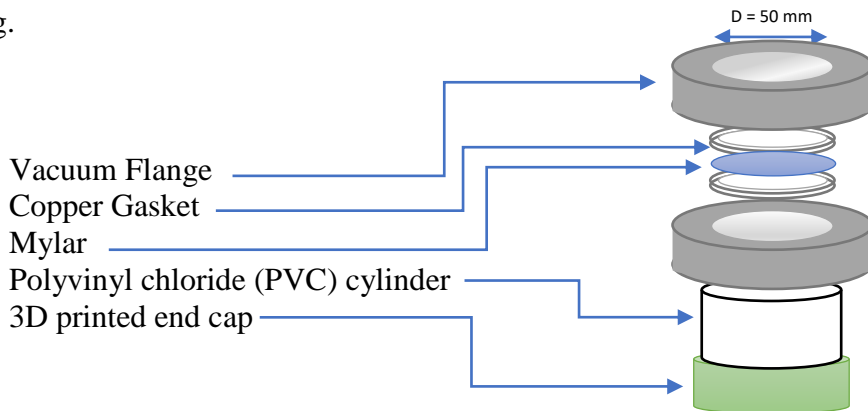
Contacts between end cap, cylinder, and bottom flange sealed with silicon. Flanges held together with eight screws.
